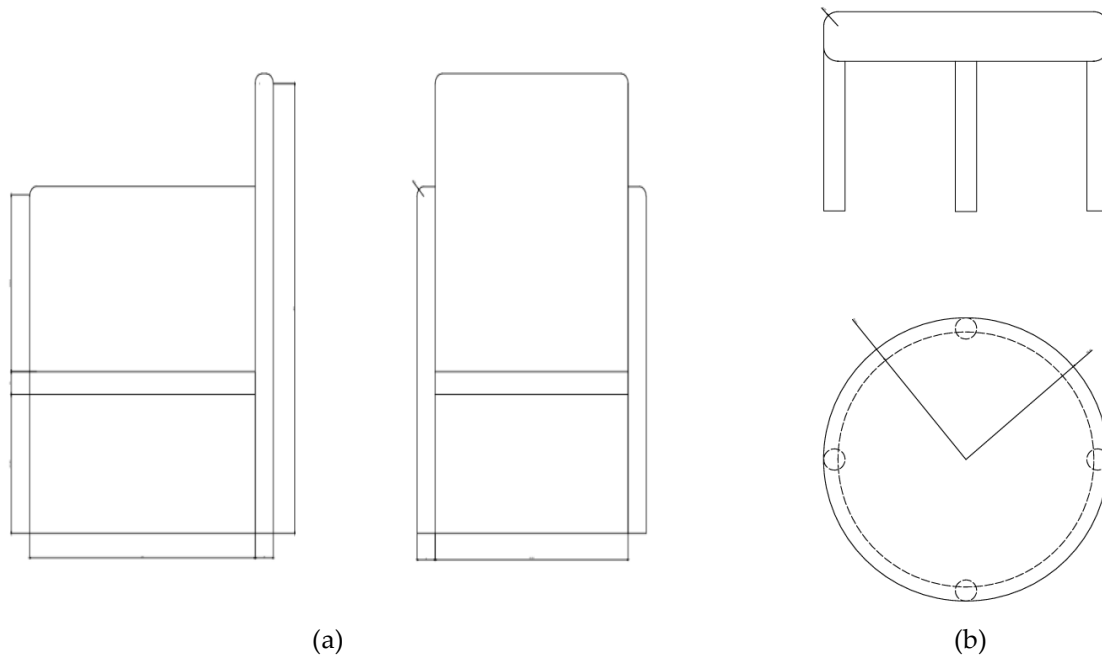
Design: (a.) seating dimension;( b.) table dimension
